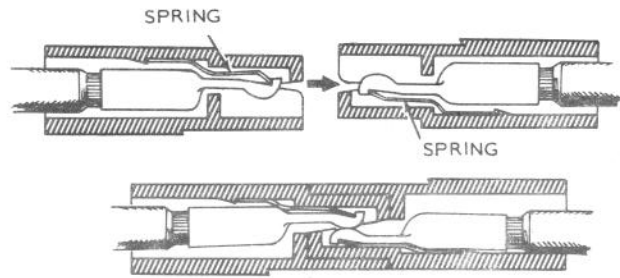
CONNECTOR HOUSING AND TERMINAL CONNECTION DETAILS
